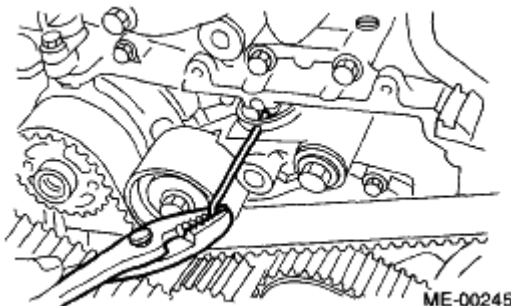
Locating Timing Belt Guide Mounting Bolts
